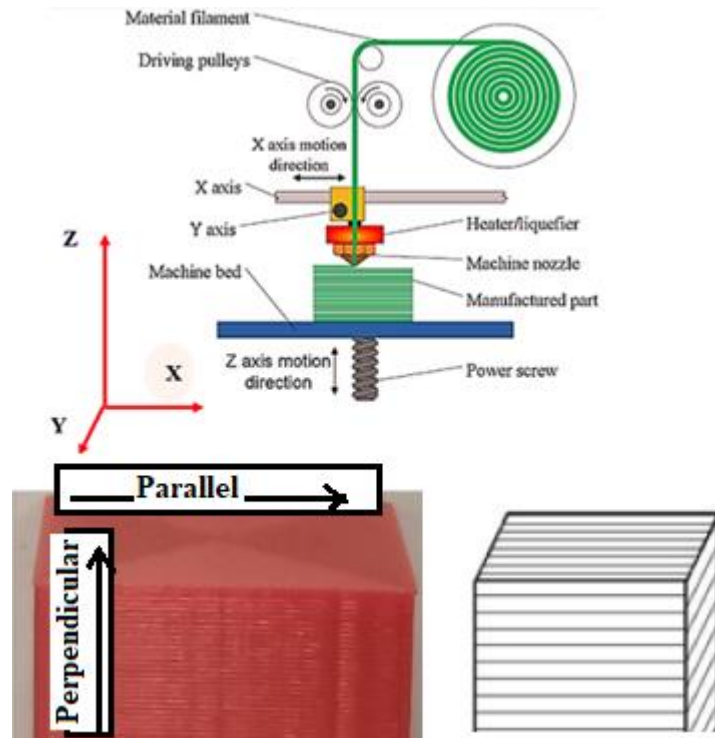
Measurements of Perpendicular and Parallel to the printing direction
